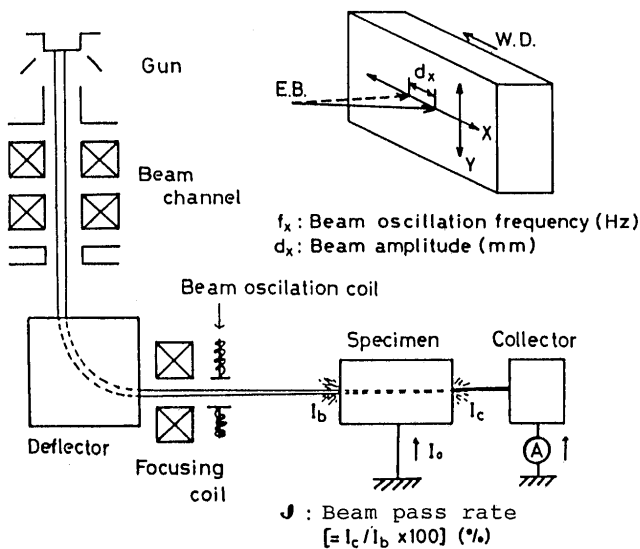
Schematic diagram of horizontal position welding method
